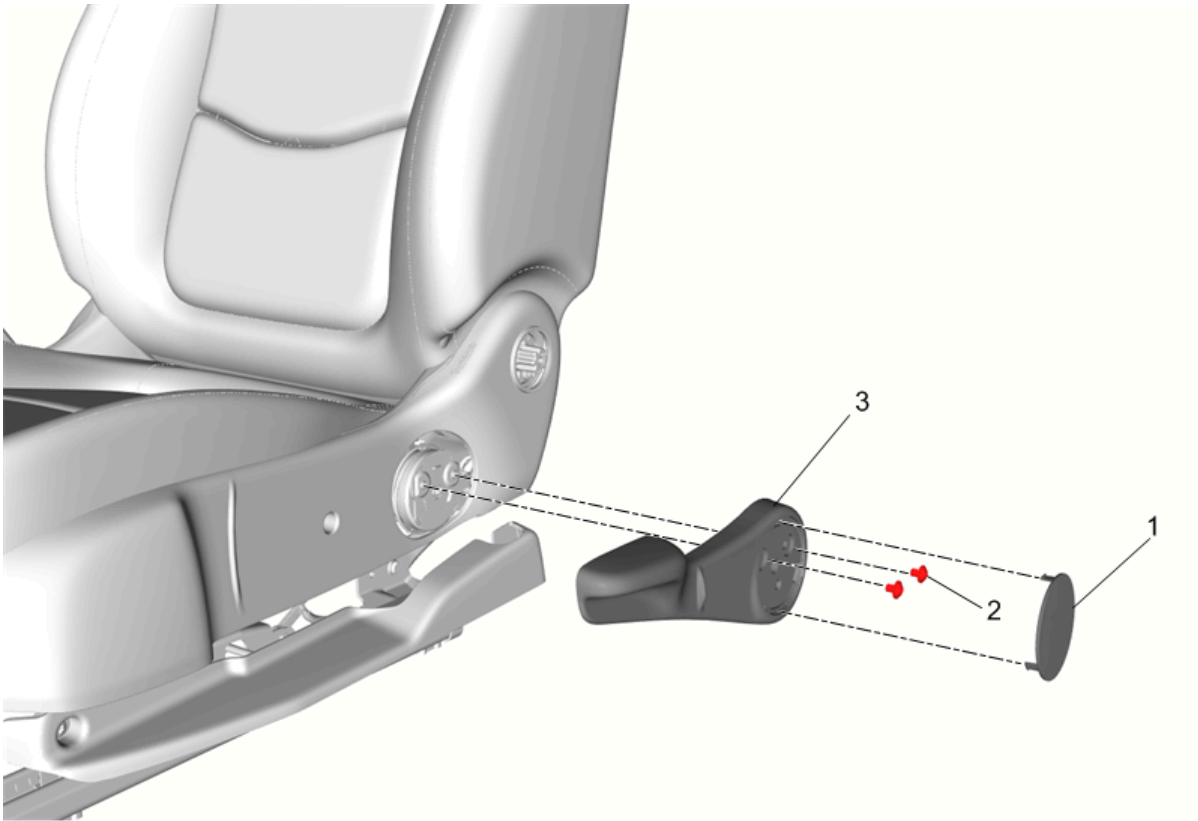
Driver or Passenger Seat Adjuster Vertical Actuator Handle
